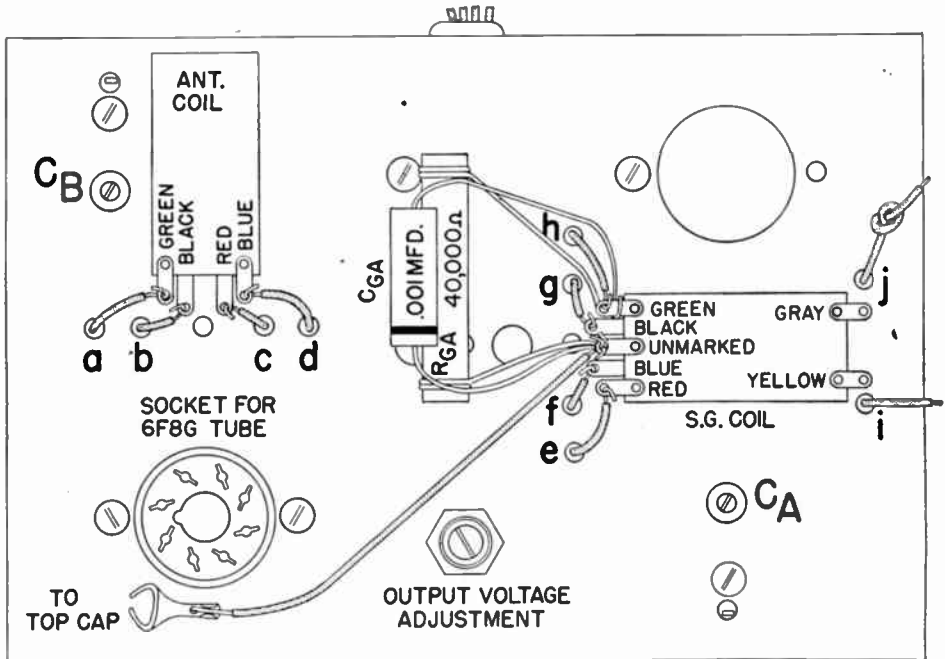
Top view of the r.f. chassis, showing how parts and wiring should appear after construction of the heat frequency r.f. oscillator in Experiment 49.
